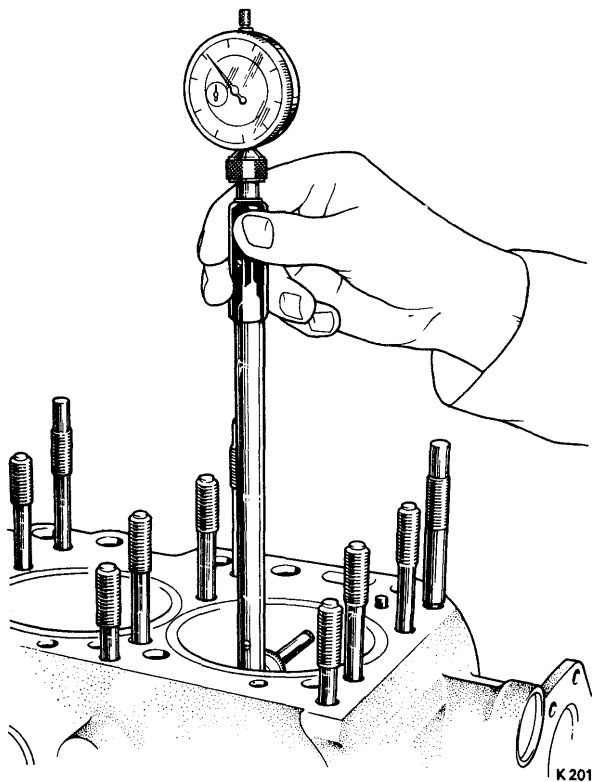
CHECKING CYLINDER BORE DIAMETER
